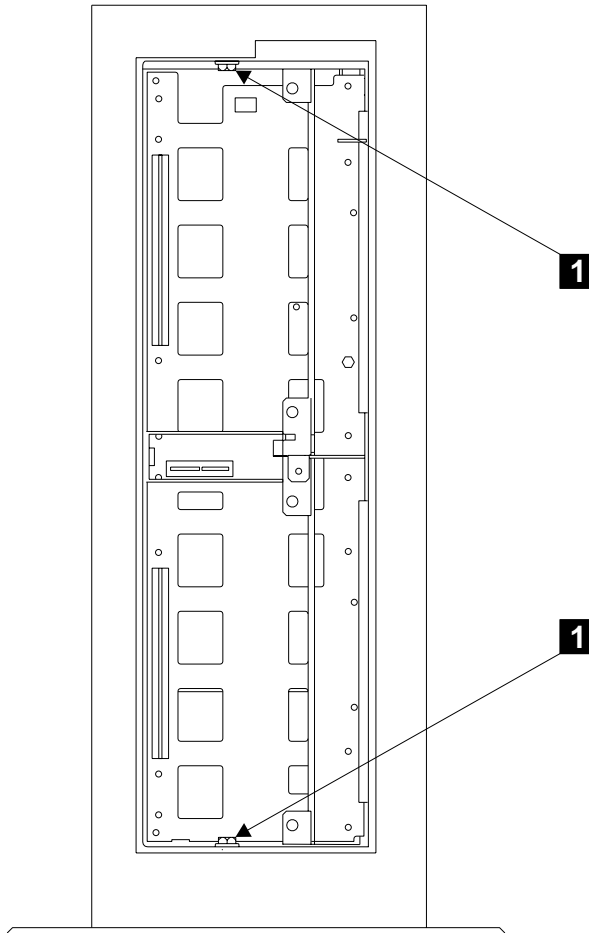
Removing the Frame from a 2104 Model TL1 (2)
